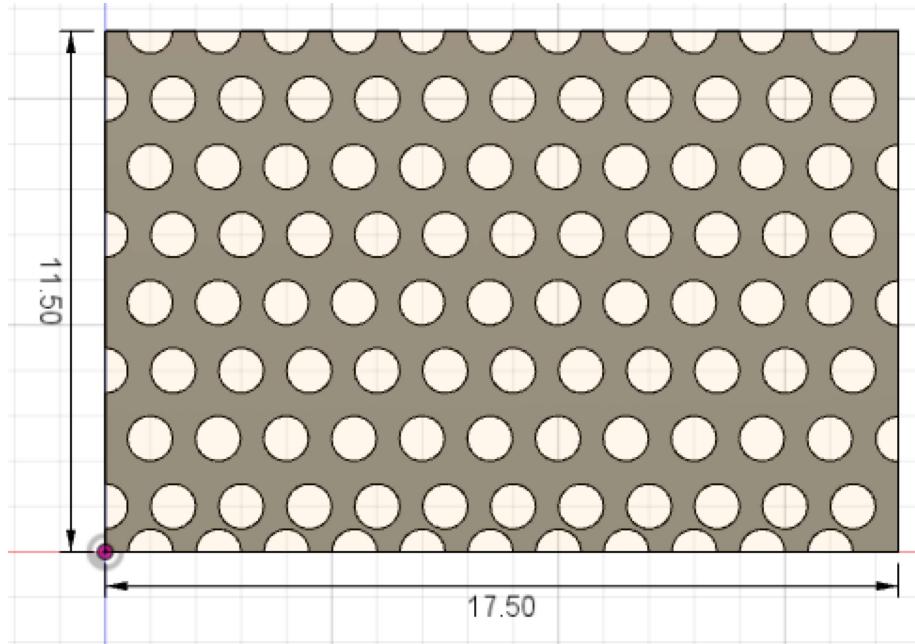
Grate for PCB Board to Lie On. (Units: Inches)
